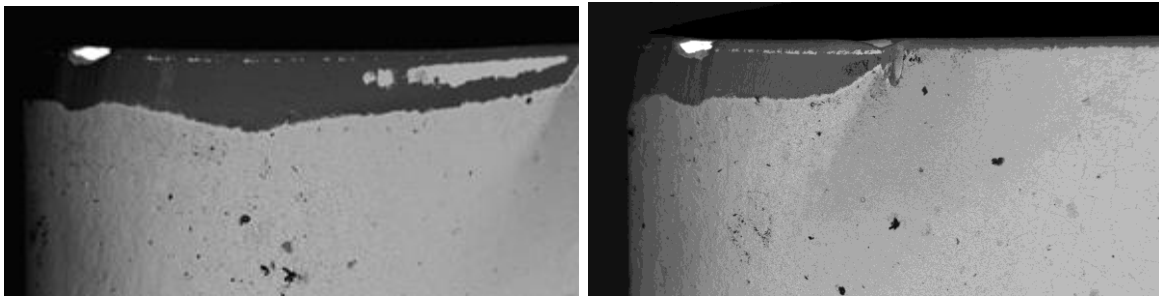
Side views of the (a) primary cutting edge and (b) the secondary cutting edge of the turning cutting tool CNMG120408 PM GC2015. (SEM-BS)
